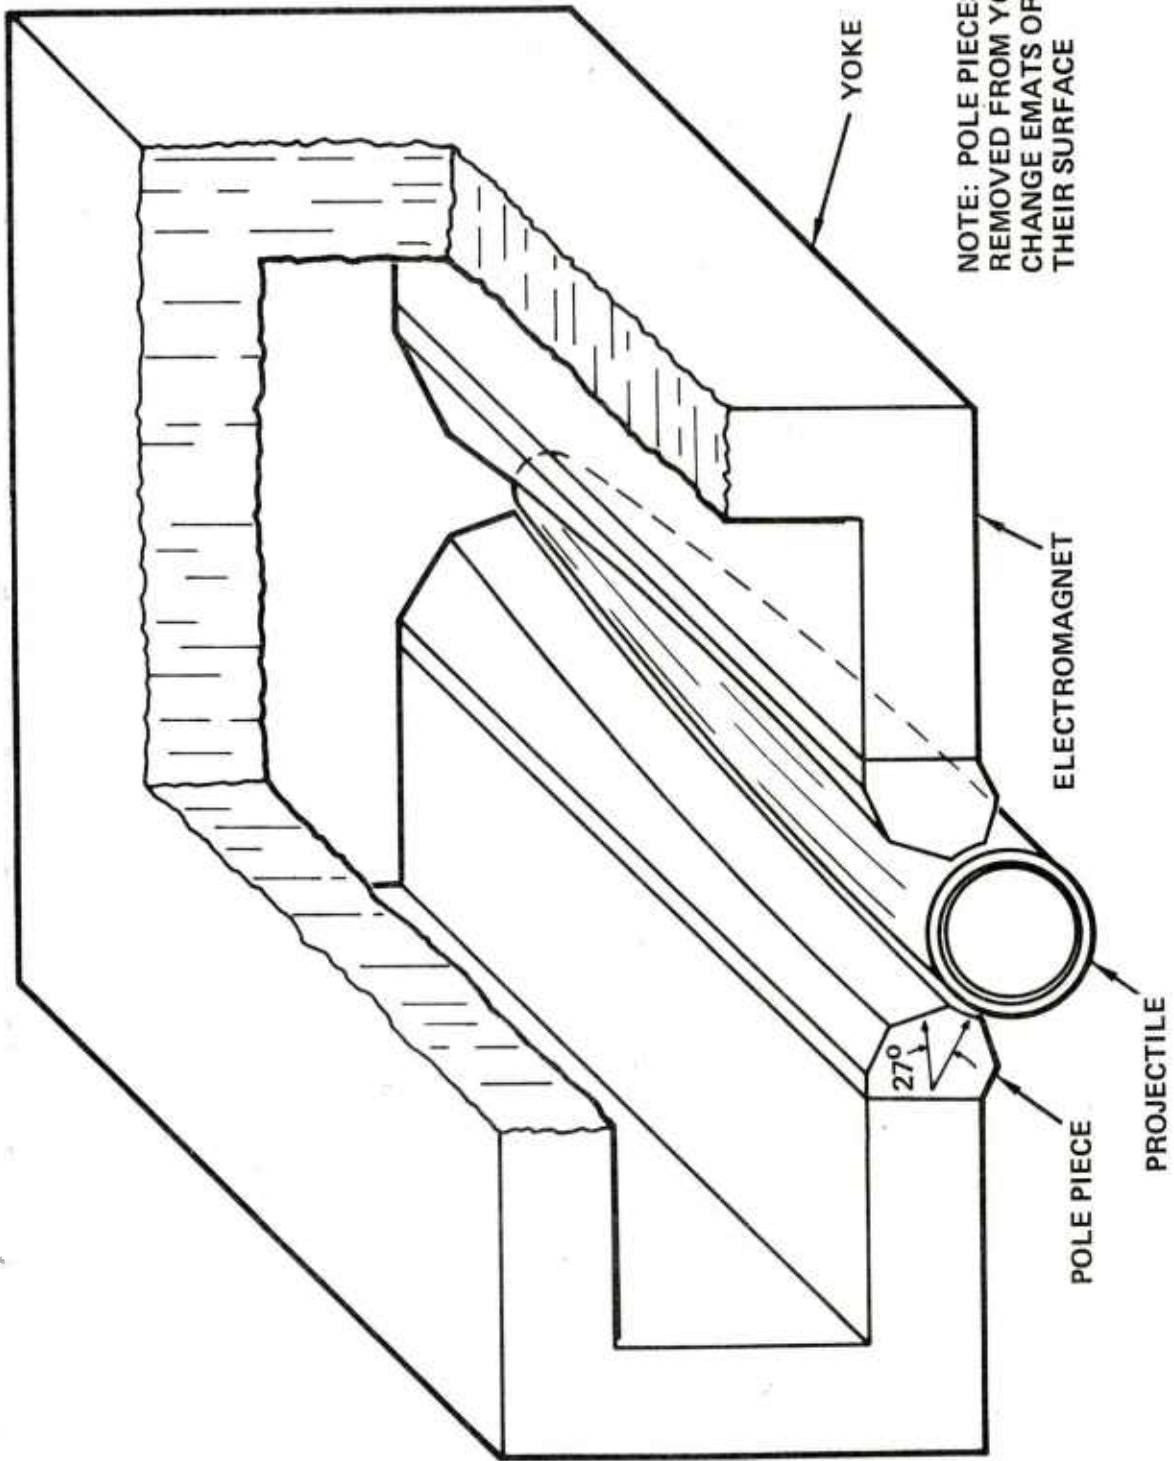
Cutaway drawing of detail of electromagnet, tilted pole piece and projectile as configured in the final inspection apparatus.
